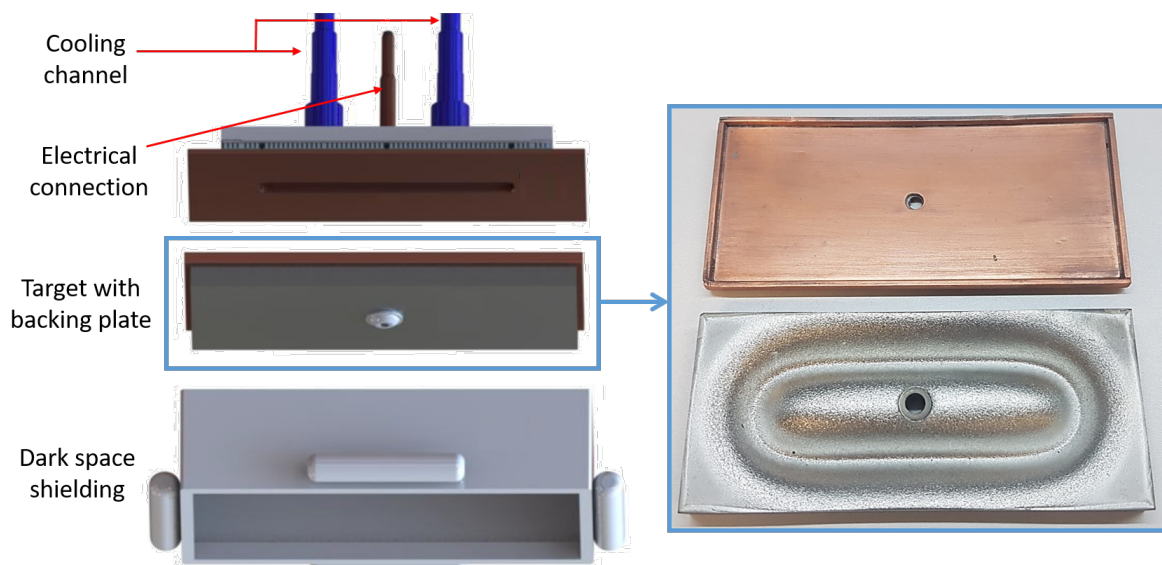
Model of the sputtering source separated in parts that can be removed manually without tools (left). On the right is a picture of a used target removed from its backing plate. Based on [12].
